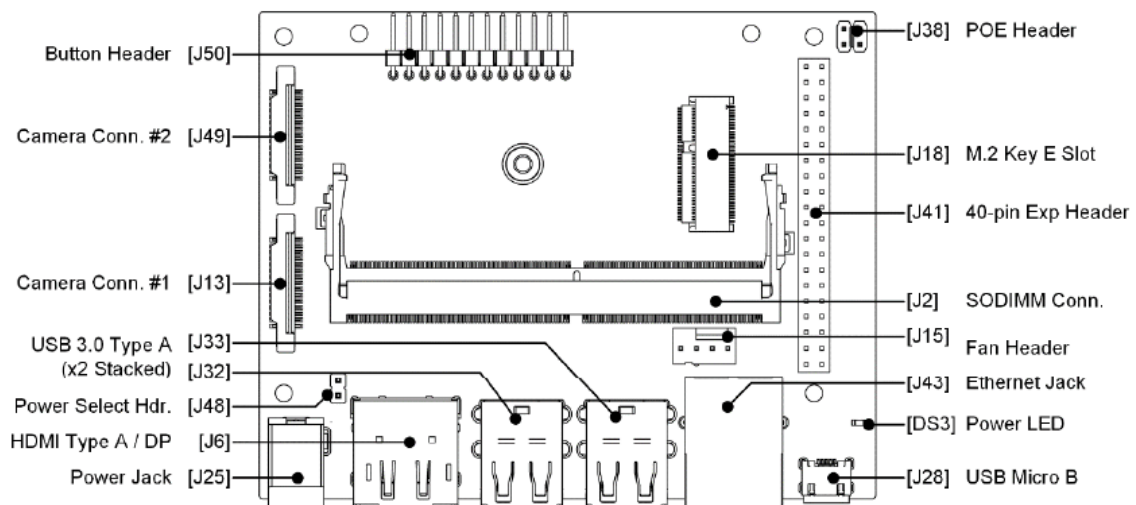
Developer kit module and carrier board: rev B01 top view.
